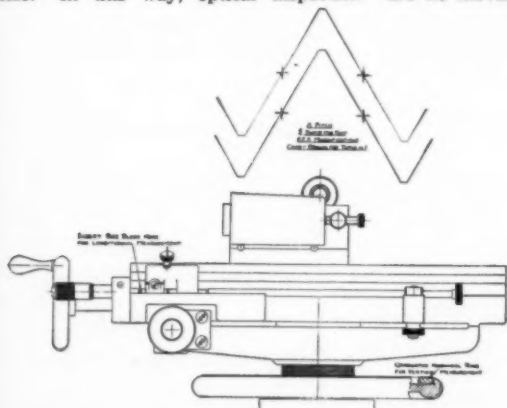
Taper pipe chaser mounted in projector stage for inspection.
